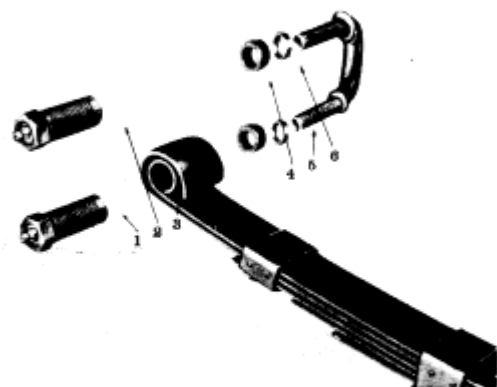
SPRING SHACKLE—RIGHT SPRING
